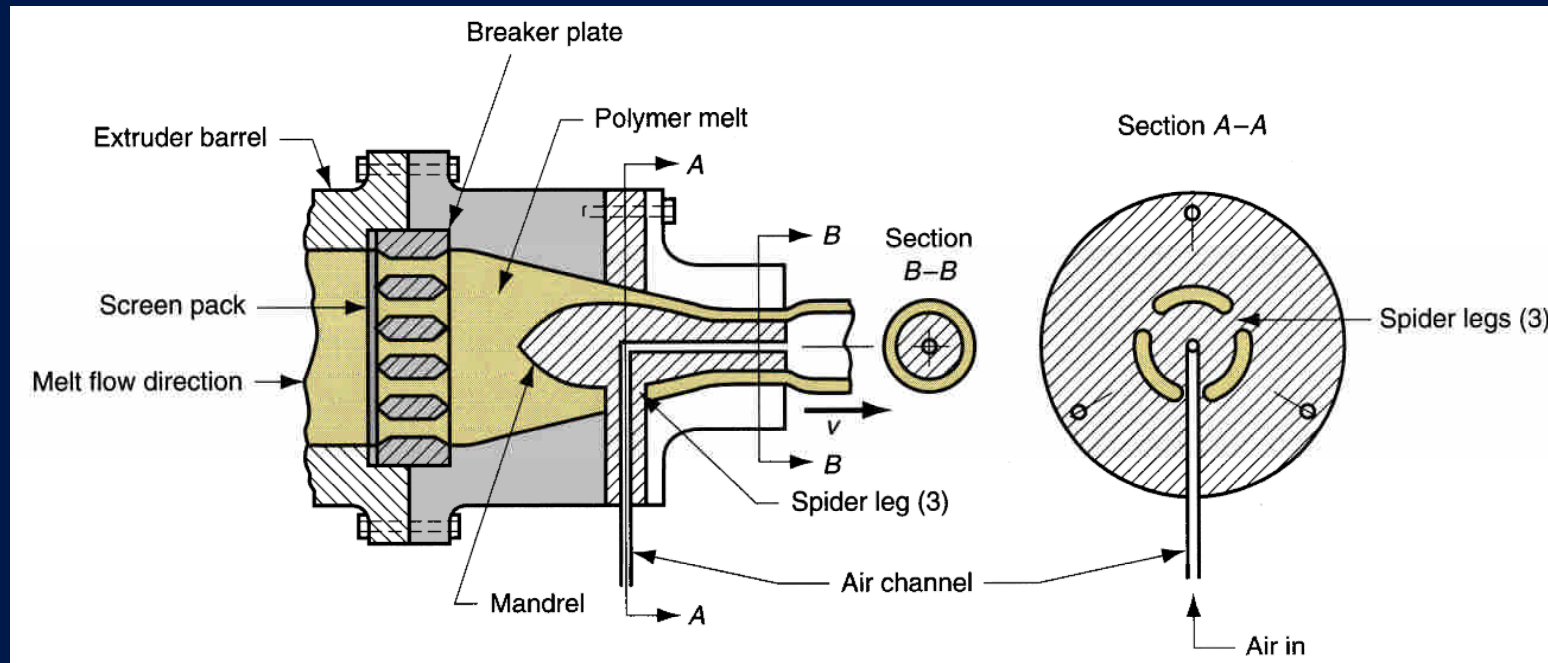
Side view cross-section of extrusion die for shaping hollow cross-sections such as tubes and pipes; Section A-A is a front view cross-section showing how the mandrel is held in place; Section B-B shows the tubular cross-section just prior to exiting the die; die swell causes an enlargement of the diameter
